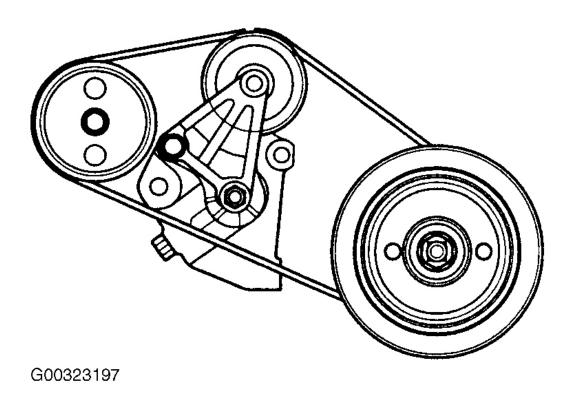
Power Steering Belt Routing Courtesy of KIA MOTORS AMERICA, INC.
